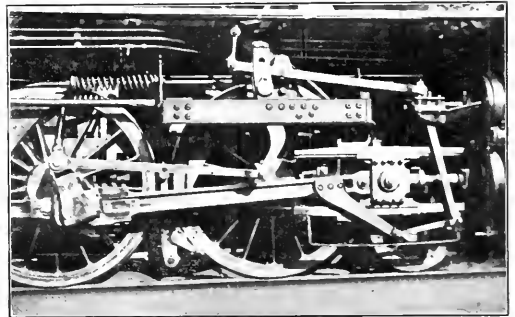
Gear Shaft and Rack for the Berdan Brake Rigging
